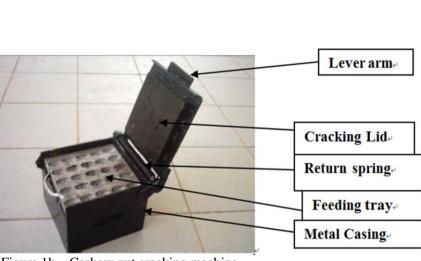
Ergonomically designed Figure 1b Cashew nut cracking machine cashew nut cracker
